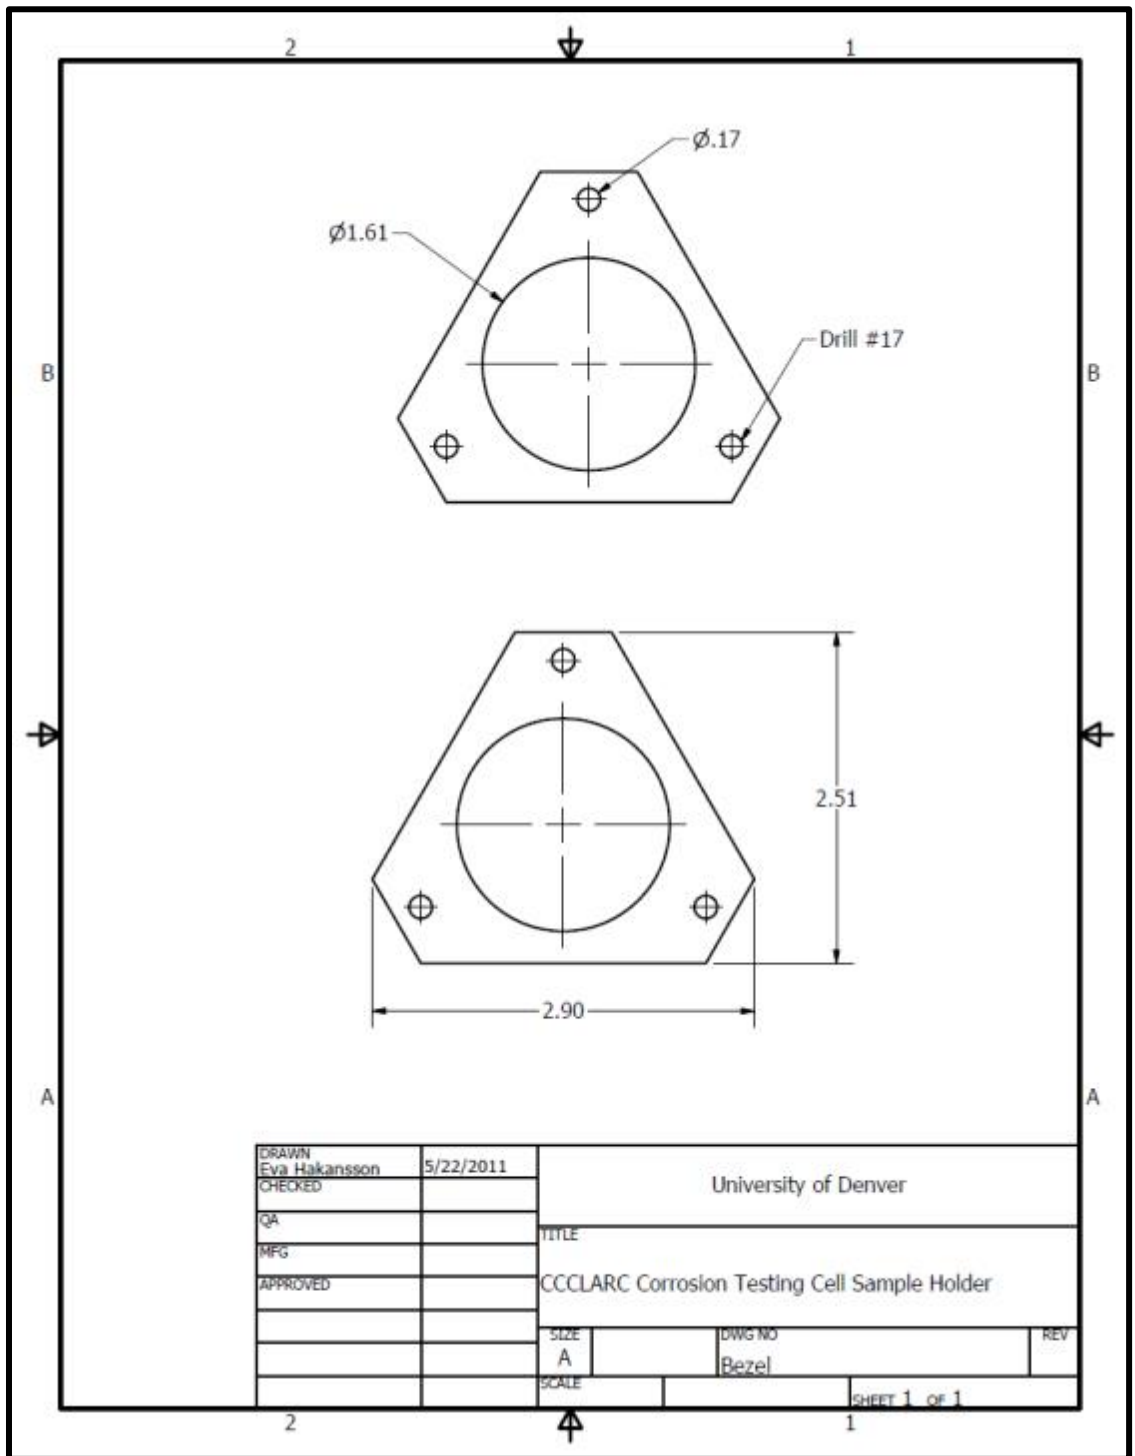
Drawing of sample holder for the C³LARC testing cell.
